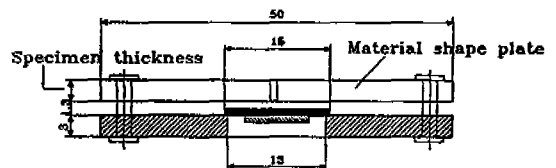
Equipment for measuring of prssure distribution beneath workpiece.
